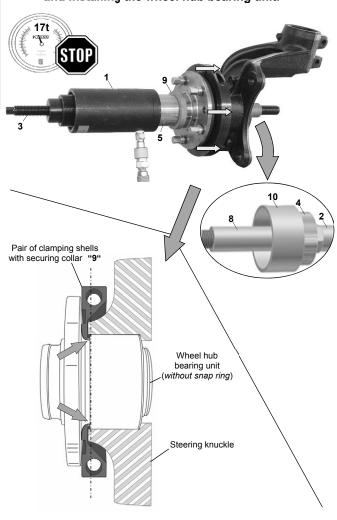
Mounting the tool to steering knuckle and installing the wheel hub bearing unit.
